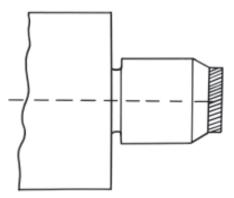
The section prepared for cutting an external thread should appear similar to this drawing. Again the recess is to allow the thread to be cut cleanly at the rear of the section. There is a tapered section at the beginning to prevent the chaser from catching on a sharp edge. There is also a little tenon (shaded section) that is the size of the bottom of the thread has been cut. The minimum diameter of the thread area is equal to twice the depth of the thread plus the diameter of this little tenon.
